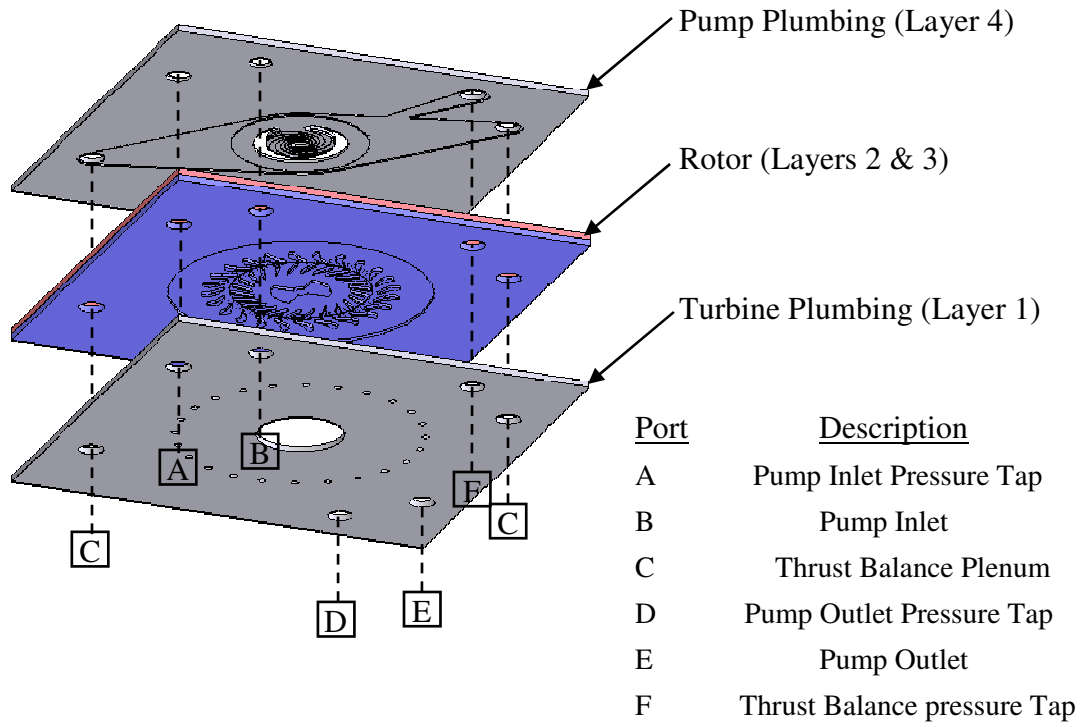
Schematic of the assembly and ports for the turbopump device.
